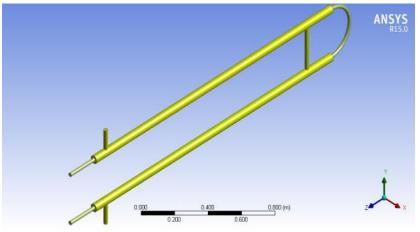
Geometry modelling of 2-Pass Double Pipe in ANSYS work bench
